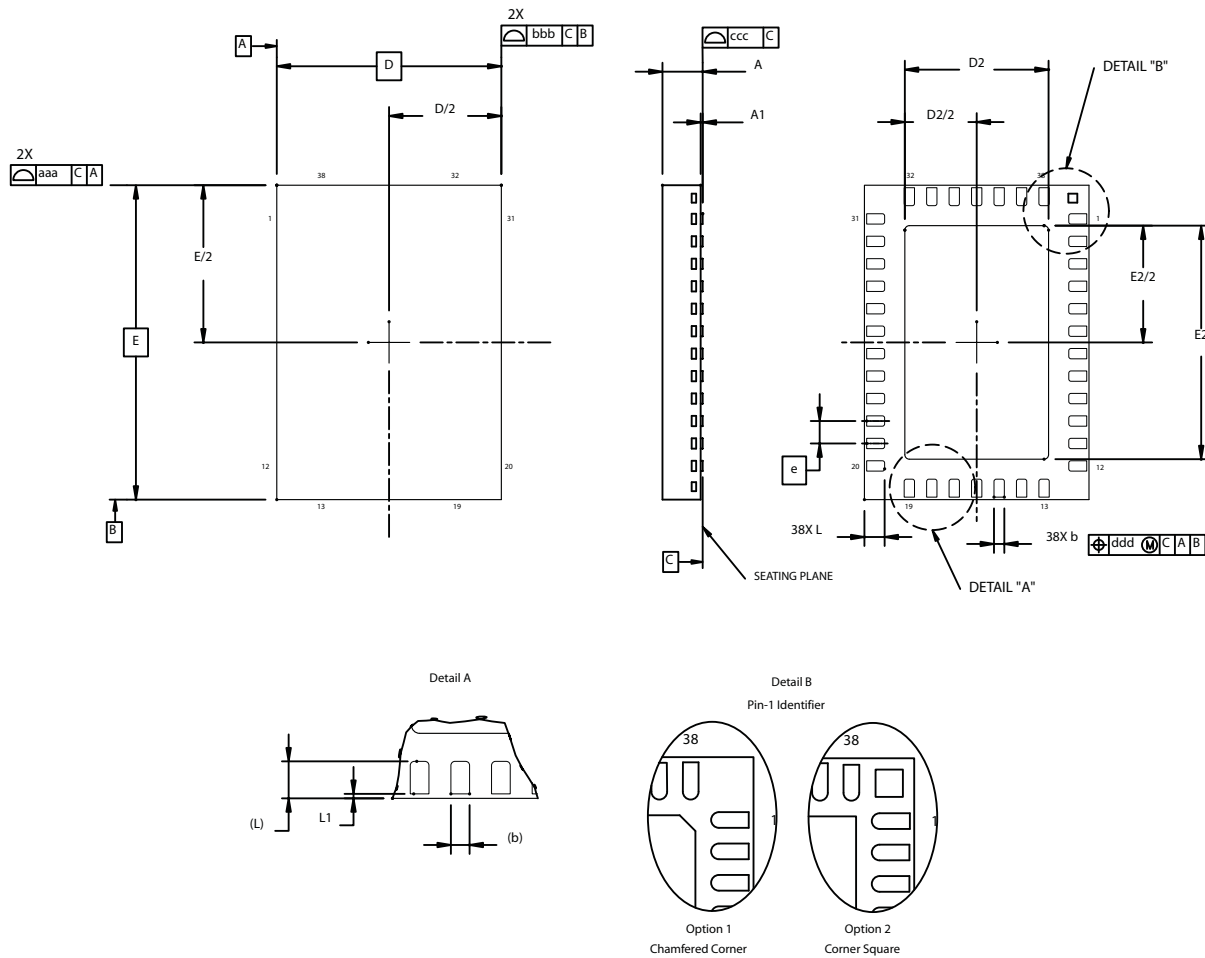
38-Pin Quad Flat No-Lead Package (QFN)
